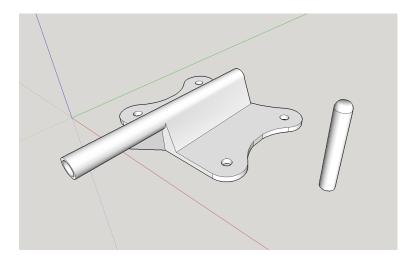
CAD design of the pushing tool. Metal spring is inserted inside to the cylinder and the stem on the right side of the image slides to the cylinder.
